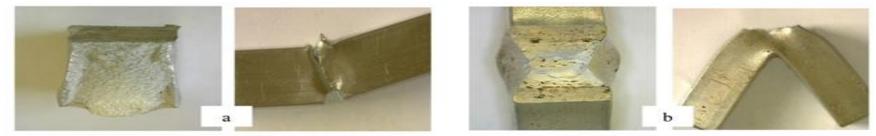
a. Front and side view of as-cast Specimen in 100 °C, b. Front and side view of theocasting Specimen in 100 °C
